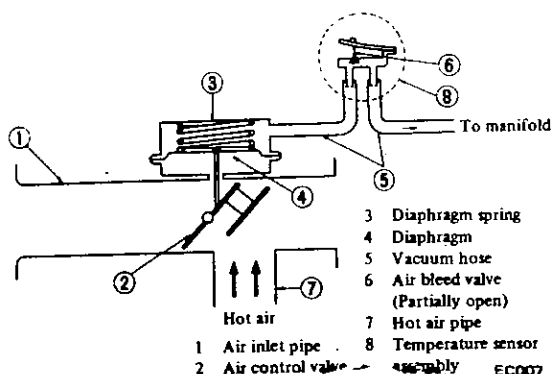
Hot Air Delivery Mold (During Cold Engine Operation)
